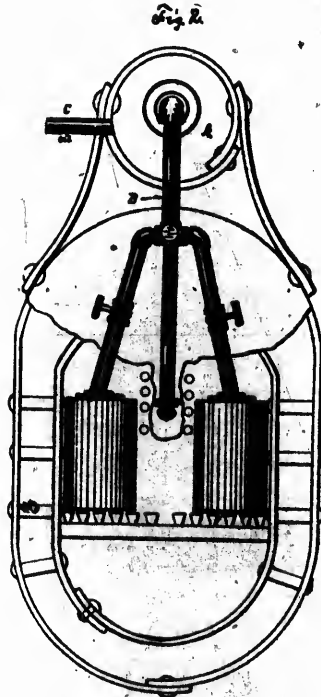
is a transverse view of a boiler, with the front plates of the boiler removed so as to show the inside of a furnace and part of my apparatus, the superheaters, therein.
